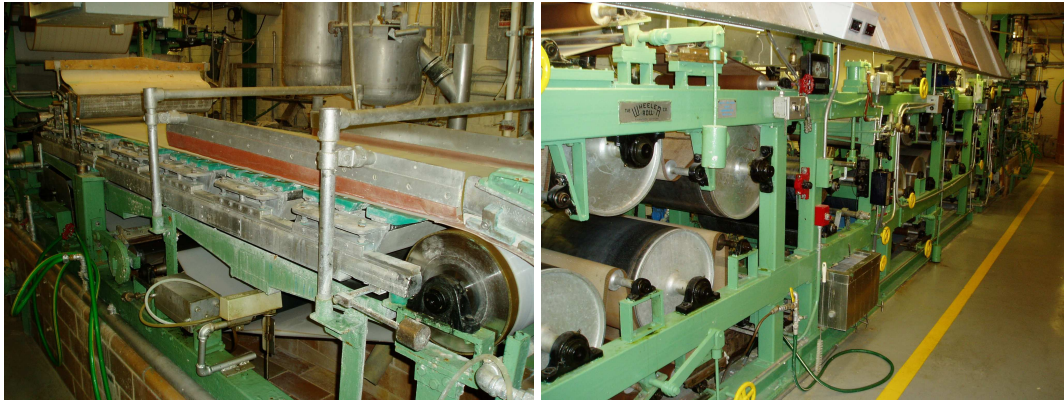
WMU pilot paper machine; *left* wet end and *right* drying section
